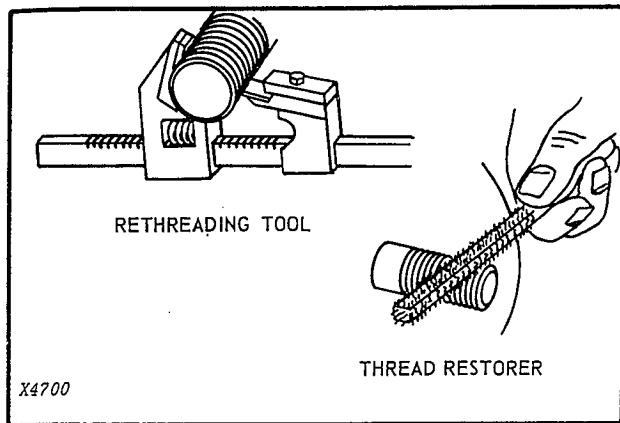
Using a Rethreading Tool and Thread Restorer
